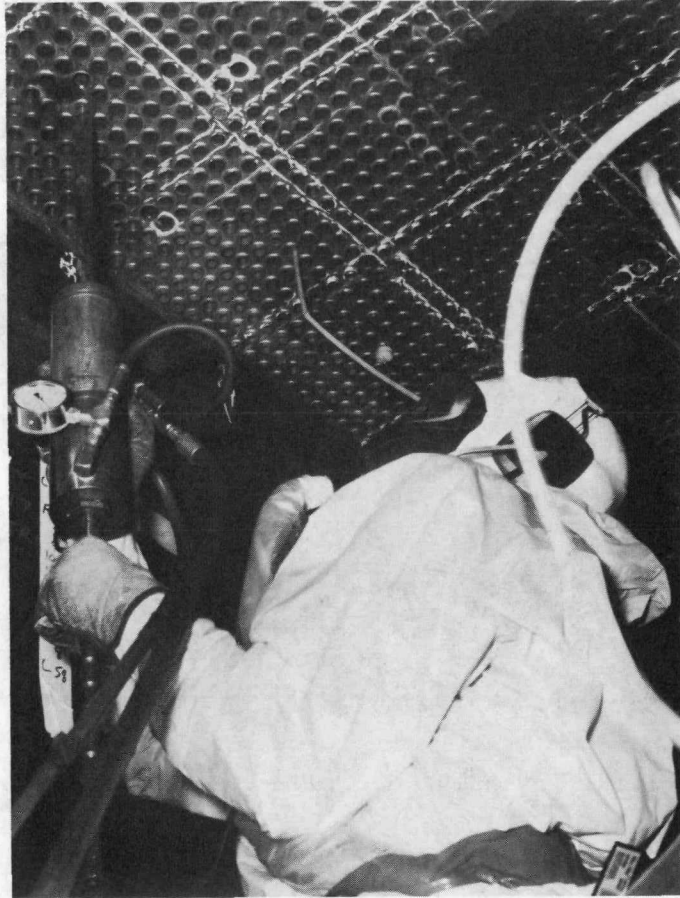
Tube Pulling Through Tube Sheet; Hydraulic Jack in Operation
